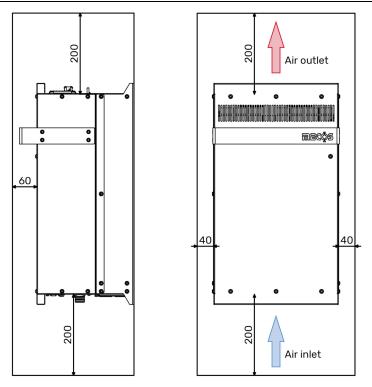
Minimum distances in the switch cabinet and air flow direction (dimensions in millimetres)
